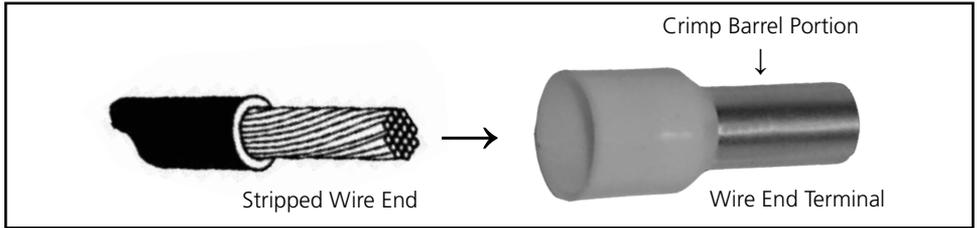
Stripped Wire End Terminal on AC Wiring
